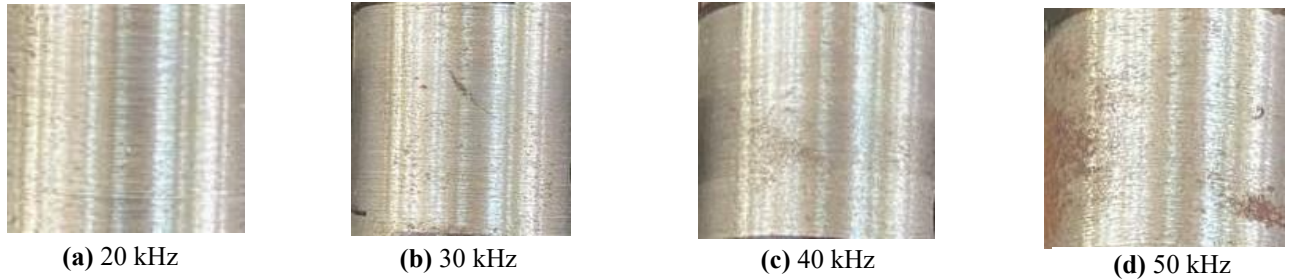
Workpiece surfaces of grinding at different frequencies
